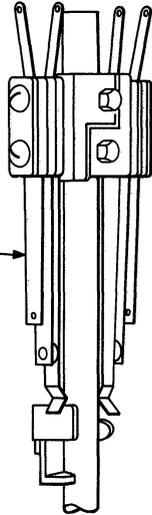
Normal Post Spring Assembly Operated by Shaft Spring Bracket
